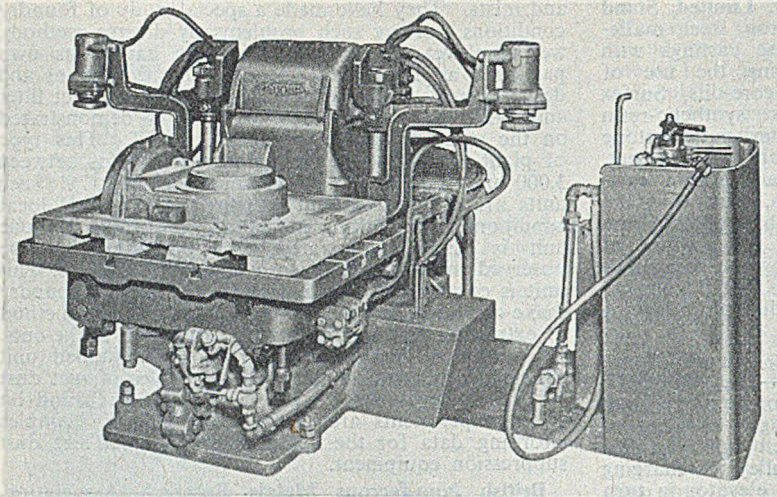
"Osborn" Rockover Jolter Moulding Machines shown by J. W. Jackman & Company, Limited.
